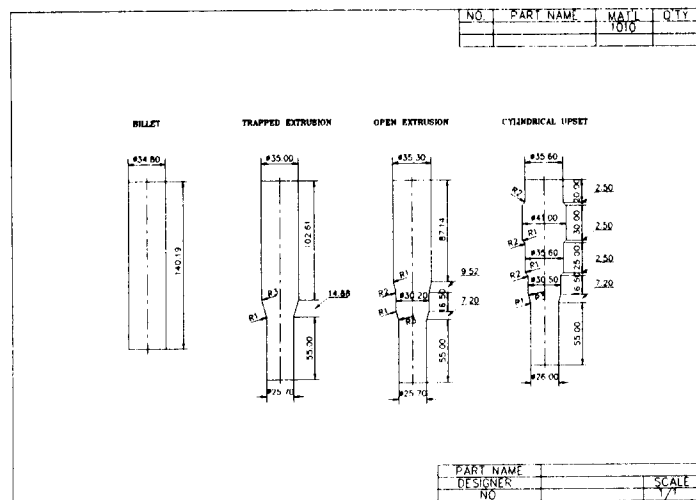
Sequence drawing considering dimensional tolerances of parts: billet diameter 35.6, material AISI 1010
